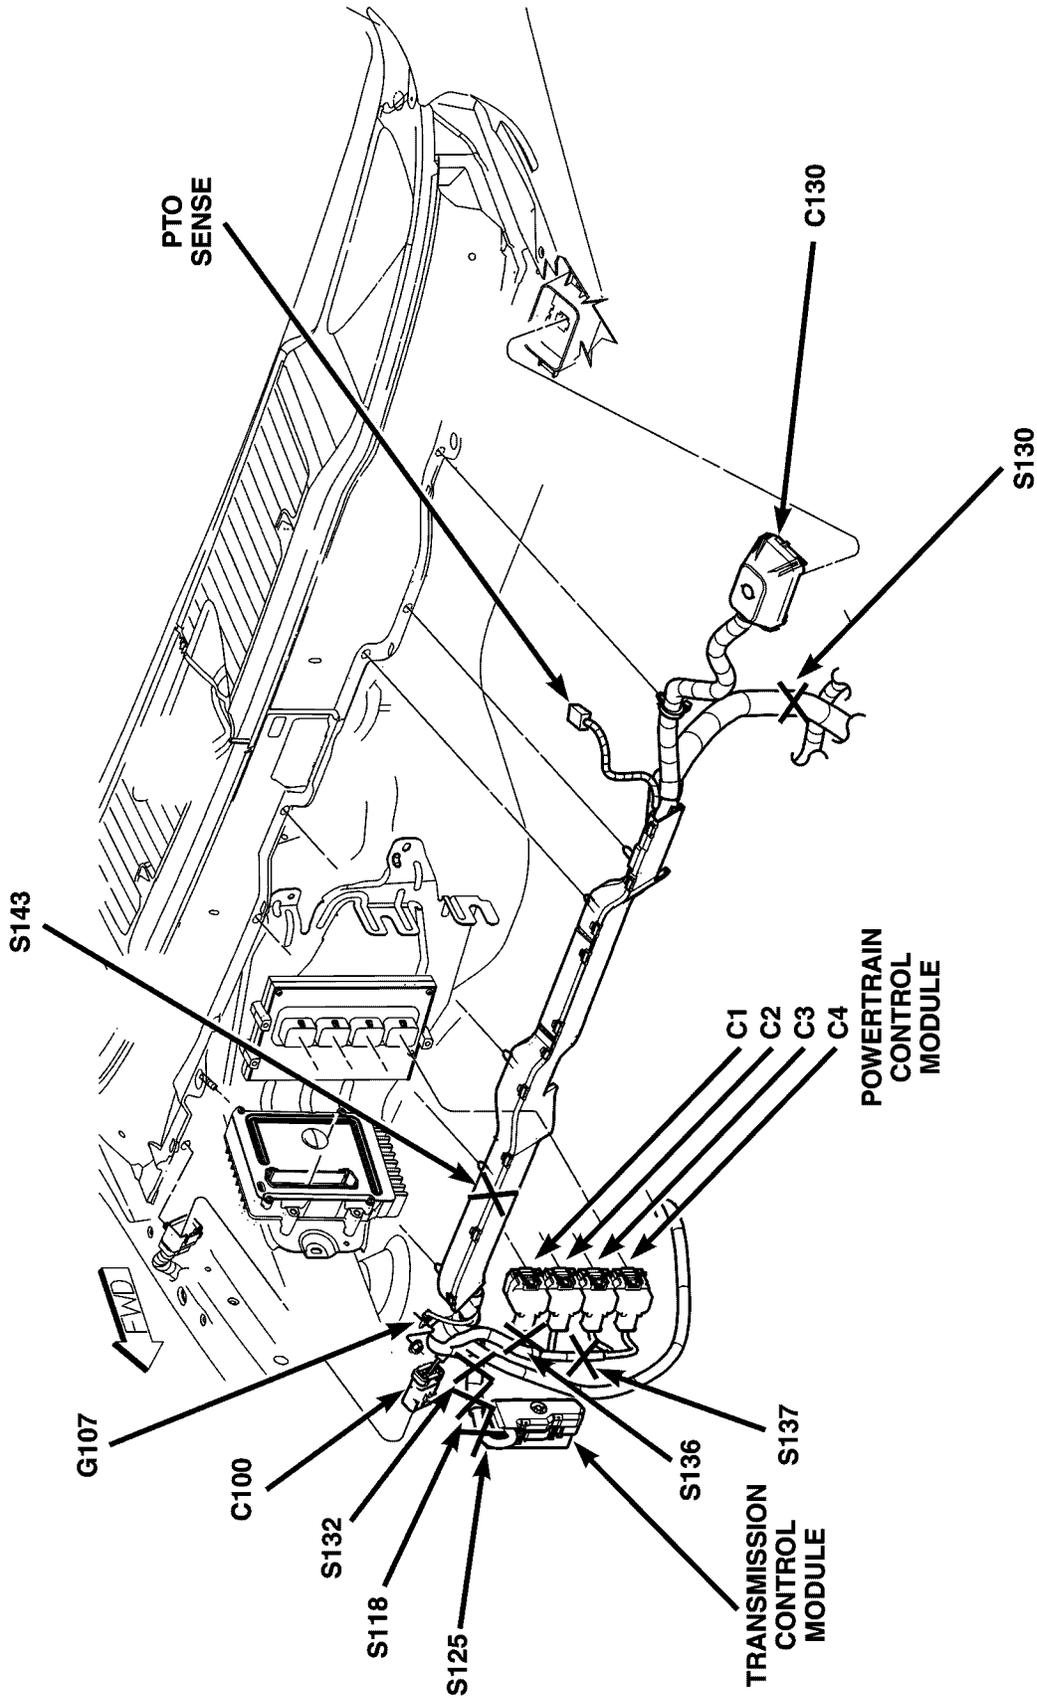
REAR ENGINE COMPARTMENT (4.7L/5.7L)
